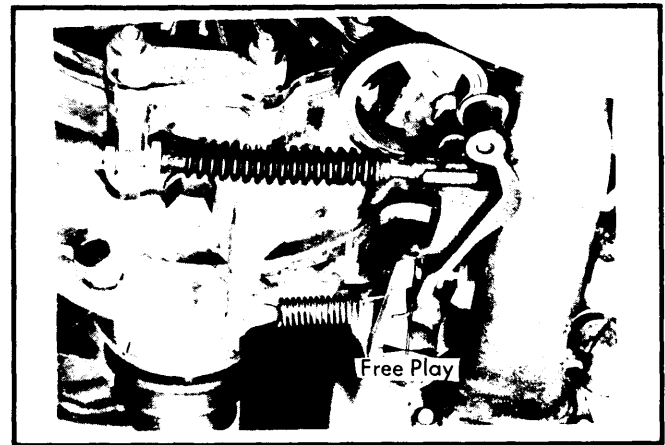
View of Clutch Adjusting Mechanism (911S & 930)
